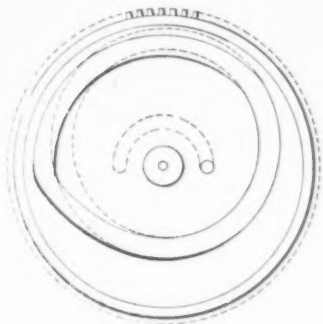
Face View of Valve Controlling Cam Mechanism.
